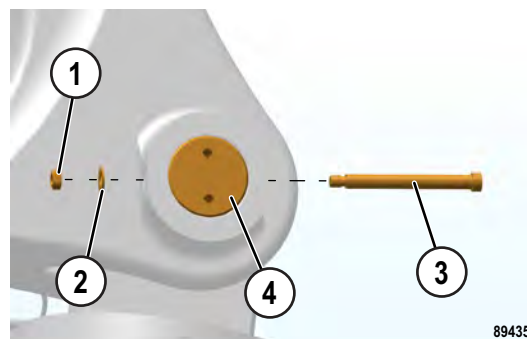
SHOULDER BOLT INSTALLATION
